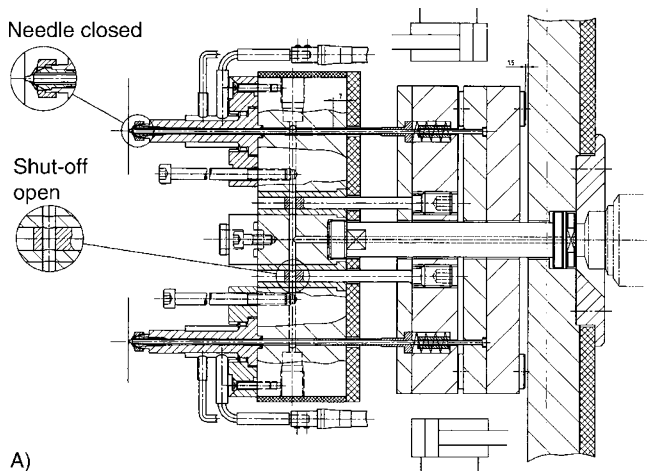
Construction and working principle of an injection mold whose cavity plates have two rows of 24 cavities each.
